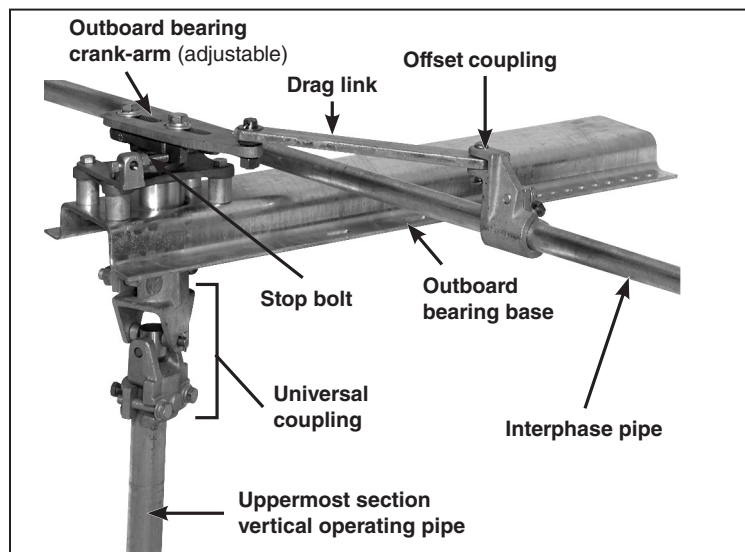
A typical outboard bearing configuration, upright mounted *between* switch poles.
